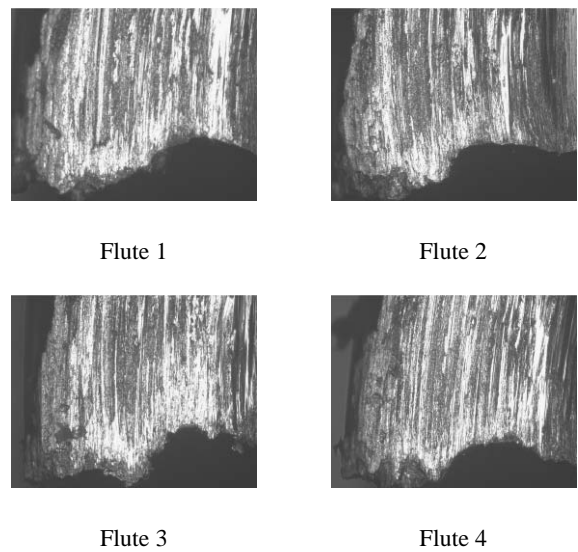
Flank wear at cutting speed of 20 m/min. with MQL
